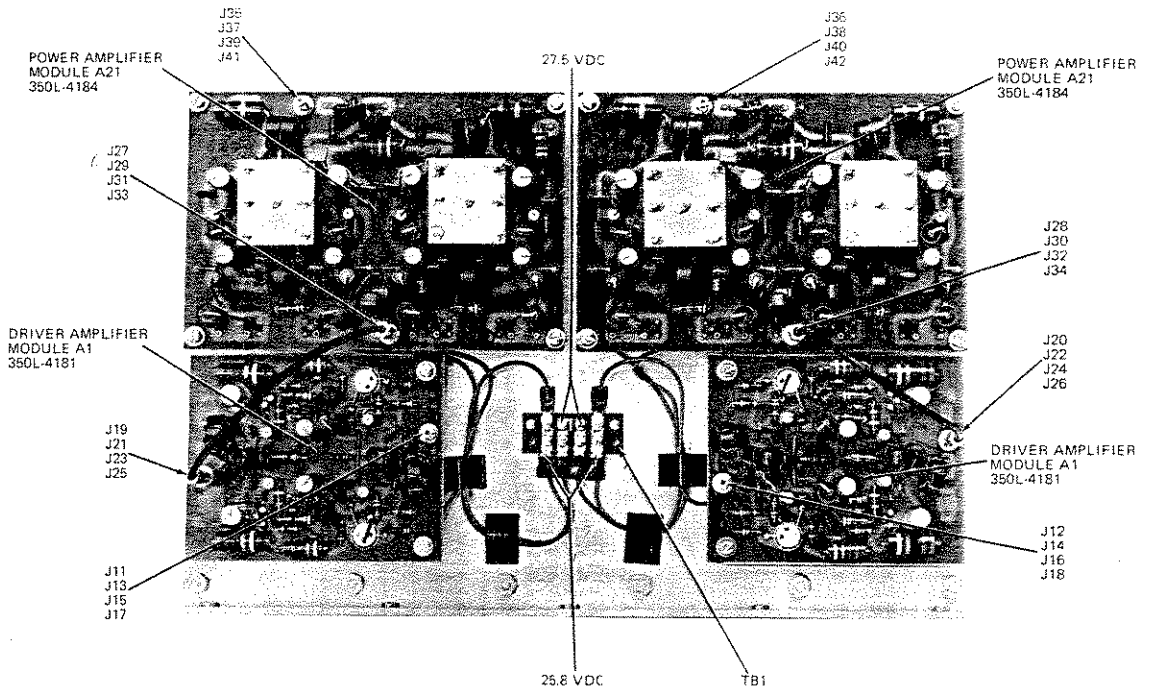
Heatsink Assembly (3100L-3206 and 3207)
